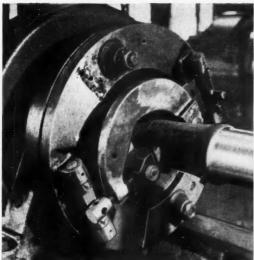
Driver for use in remachining axles. The clamping device consists of a C-shaped clamp mounted on a sliding jaw.
